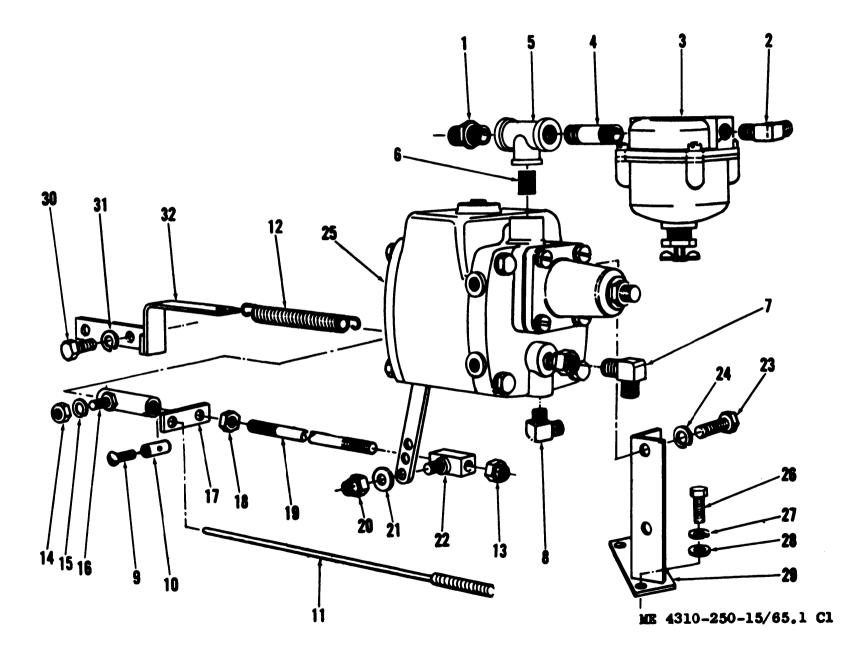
B. Moisture separator, speed control and mounting hardware, exploded view, Model 6M250RPV.
